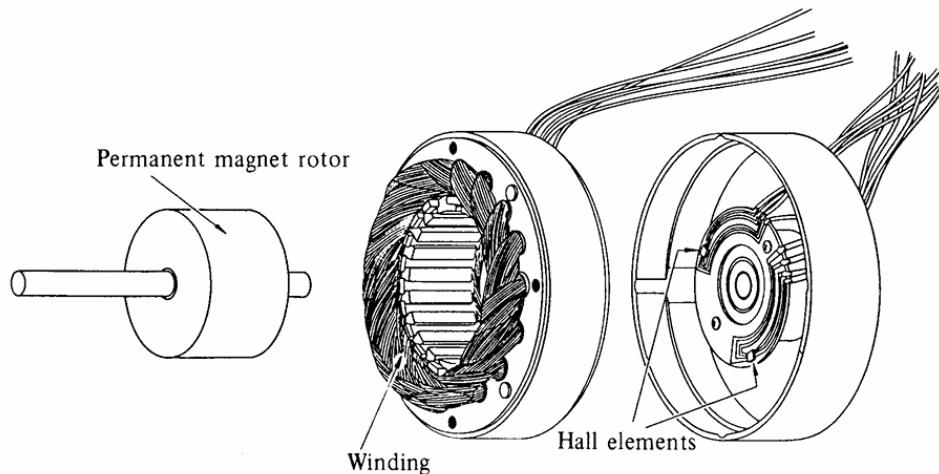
Disassembled view of a brushless DC motor: permanent magnet rotor, winding, and Hall element
